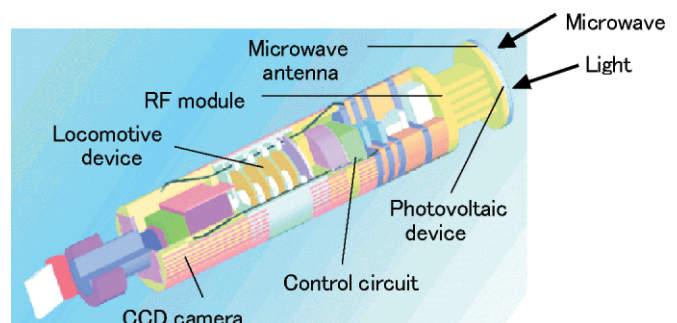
System image of wireless micro robot for inspection on inner surface of tubes
